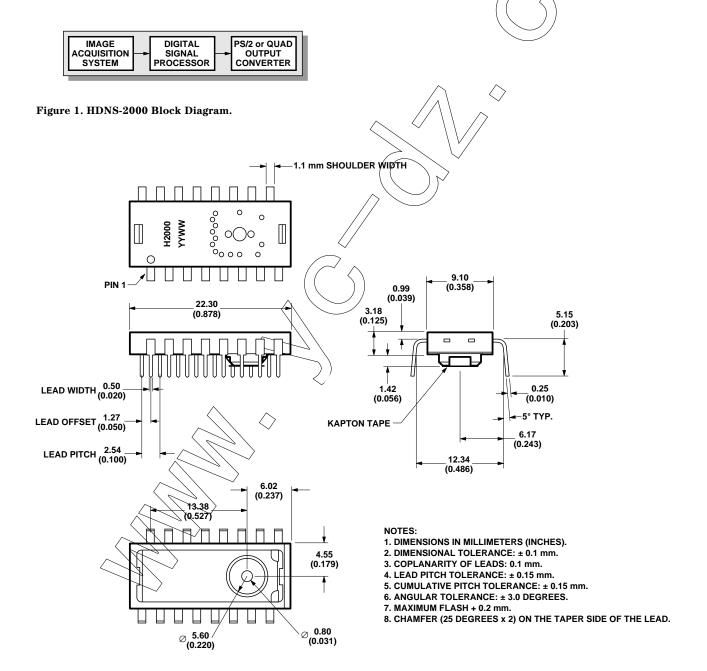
HDNS-2000 Sensor Package Outline Drawing.
